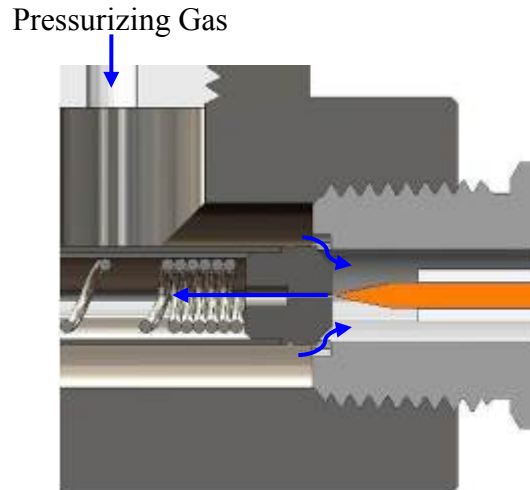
Close-up of gas fill process and top end plug weld location
